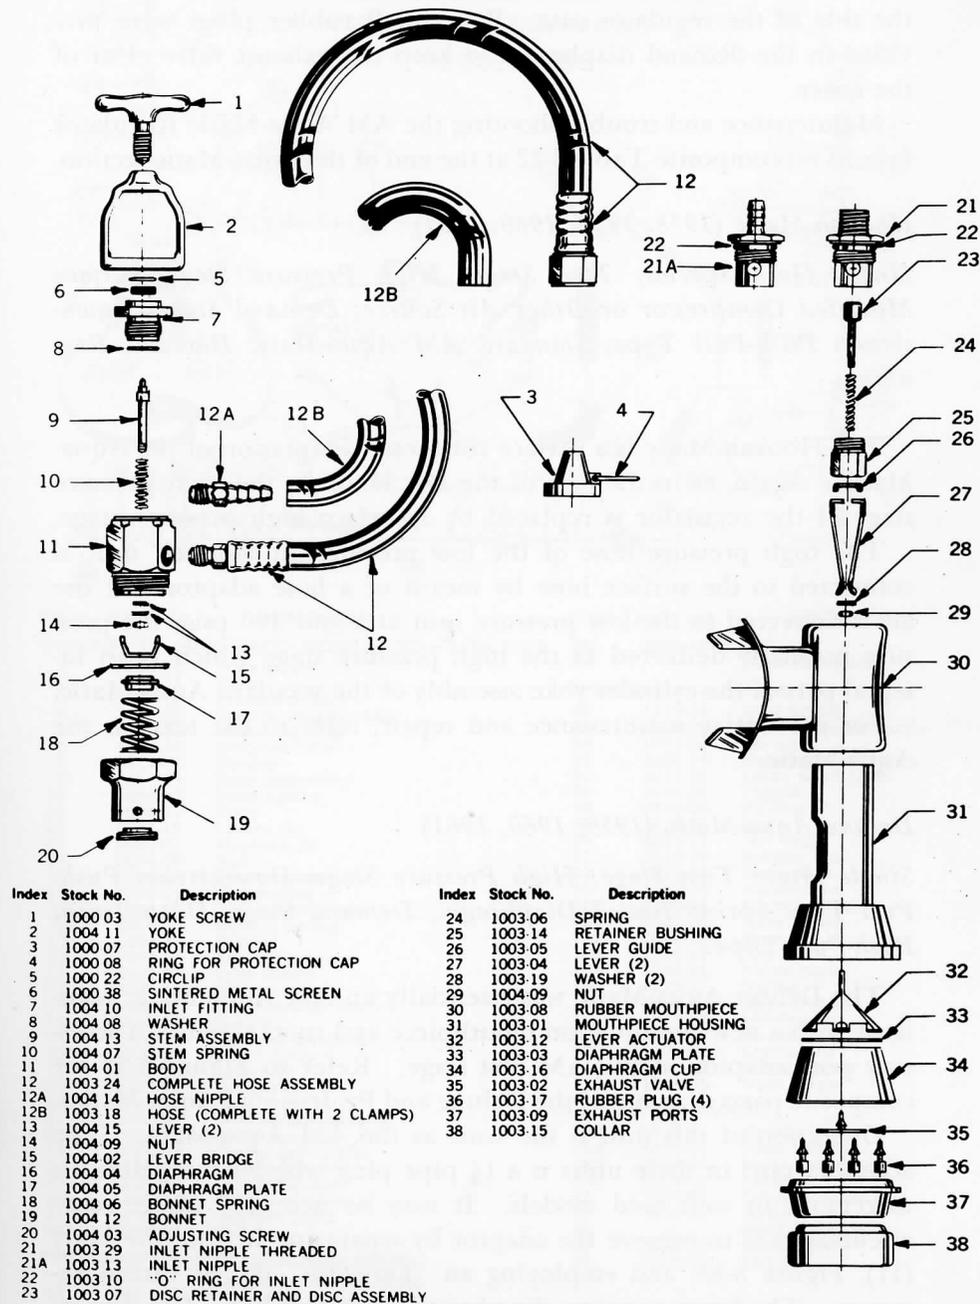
Exploded view of AM Aqua-Matic regulator and parts list. Courtesy U.S. Divers Company
